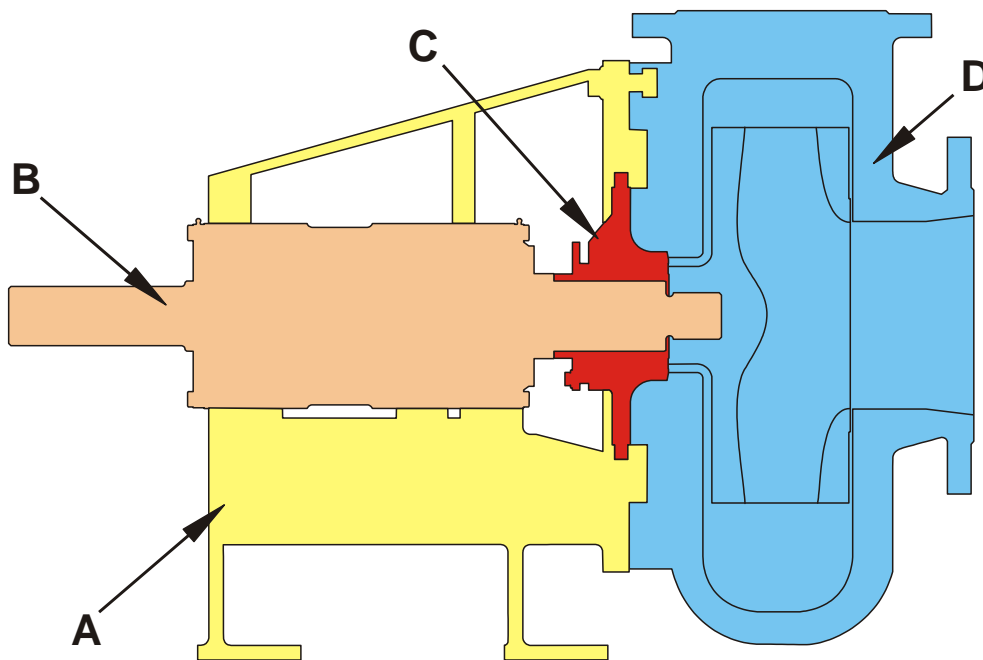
Typical outline design of Metso Minerals Slurry Pumps showing the basic pump modules: Frame (A), Bearing cylinder(B), Shaft seal(C), Wet-end (D)
